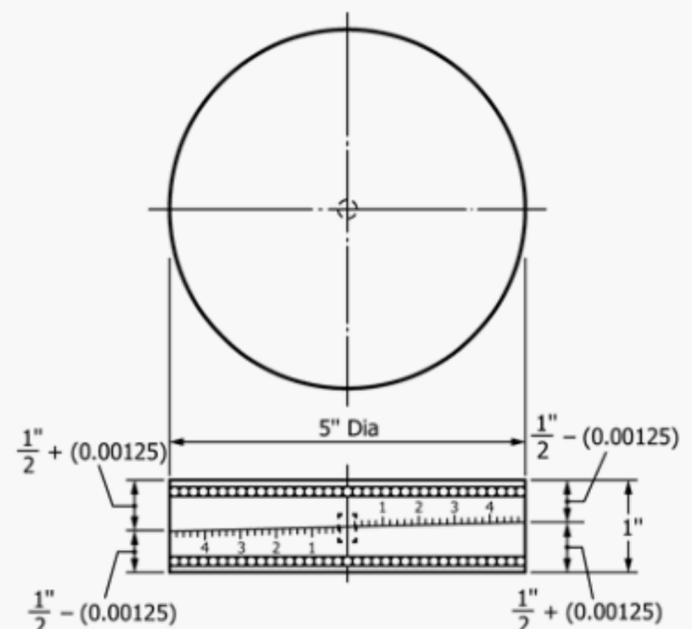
Adjustable Bearing Block for Compression Testing
